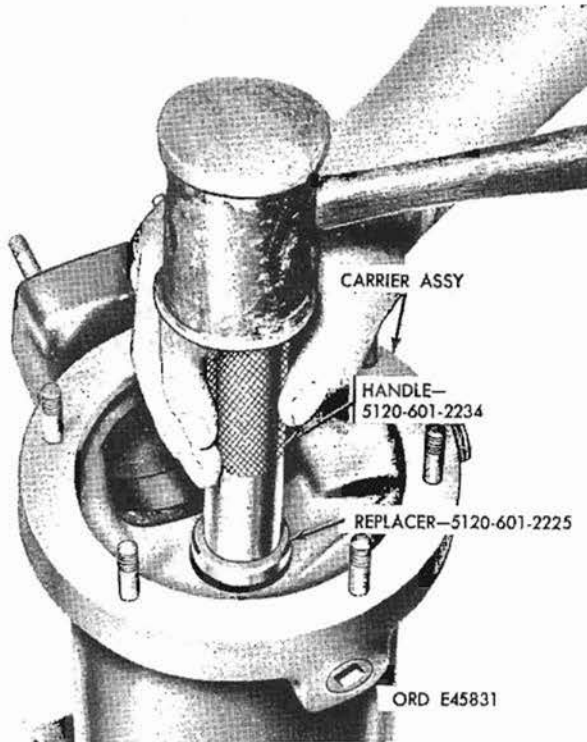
Installing plain encased seal in gear carrier assembly, using replacer - 5120-601-2225 and handle - 5120-601-2234.
